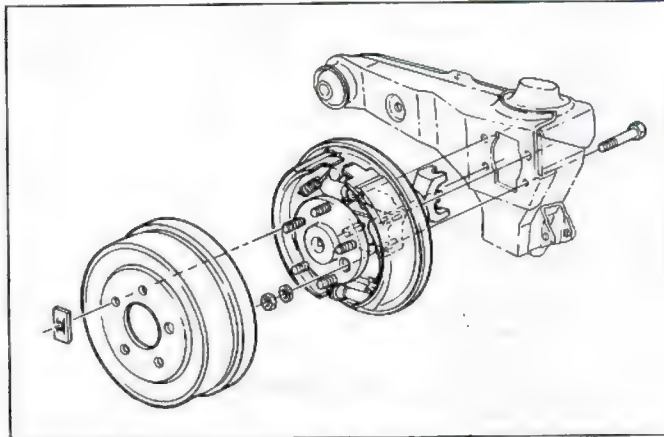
Rear Wheel Spindle, Support and Brake Removal
